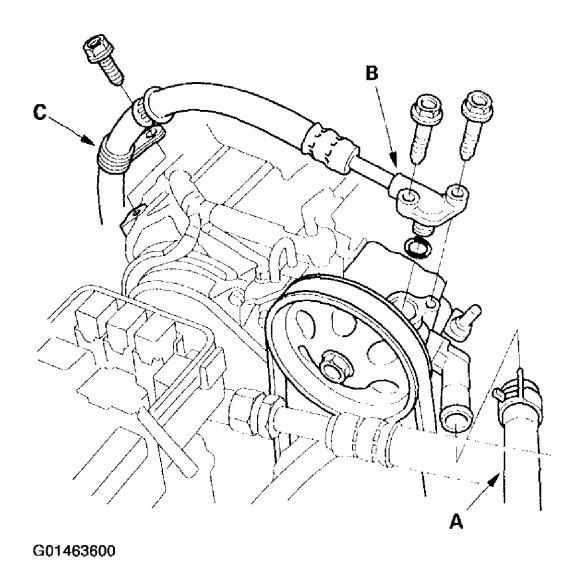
Removing The Power Steering Pump Inlet Hose & Outlet Hose From The Power Steering Pump
